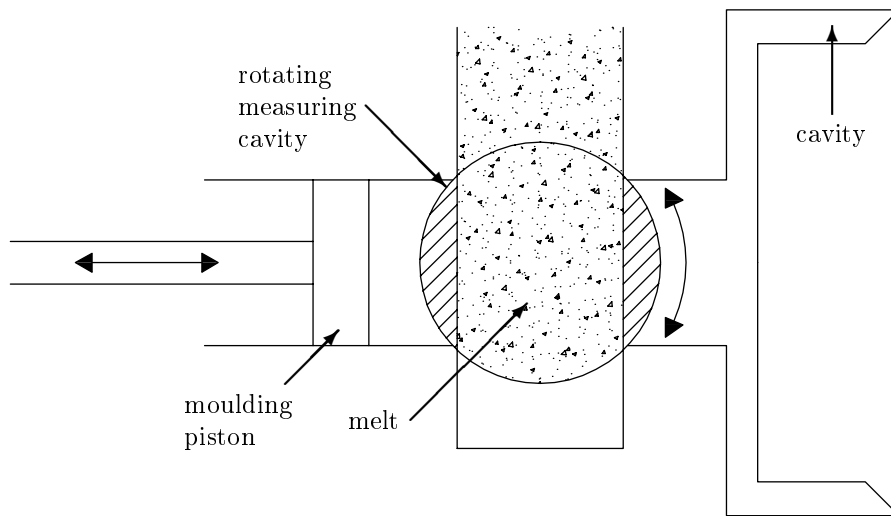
Concept 5: Inline moulding piston and rotating measuring cavity
